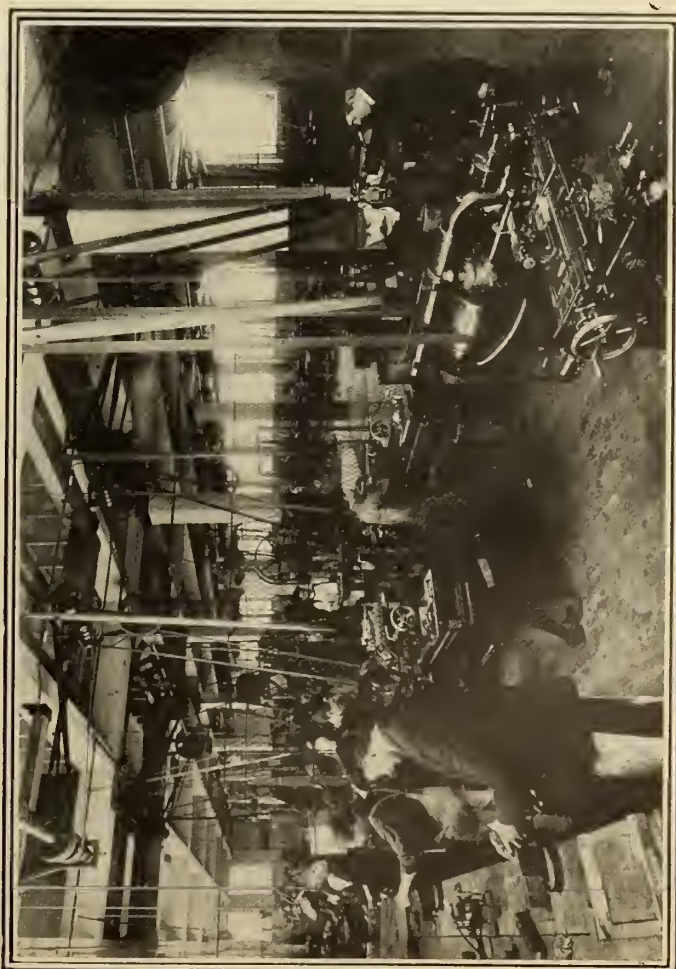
The Tool Room, Well Equipped With Modern Machinery.
